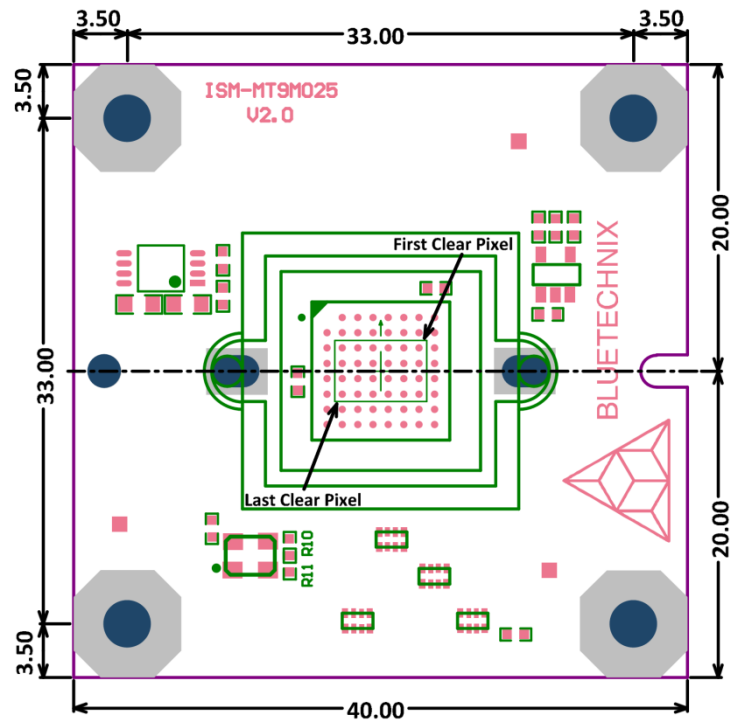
Top dimensions (mounting hole position and sensor orientation)
